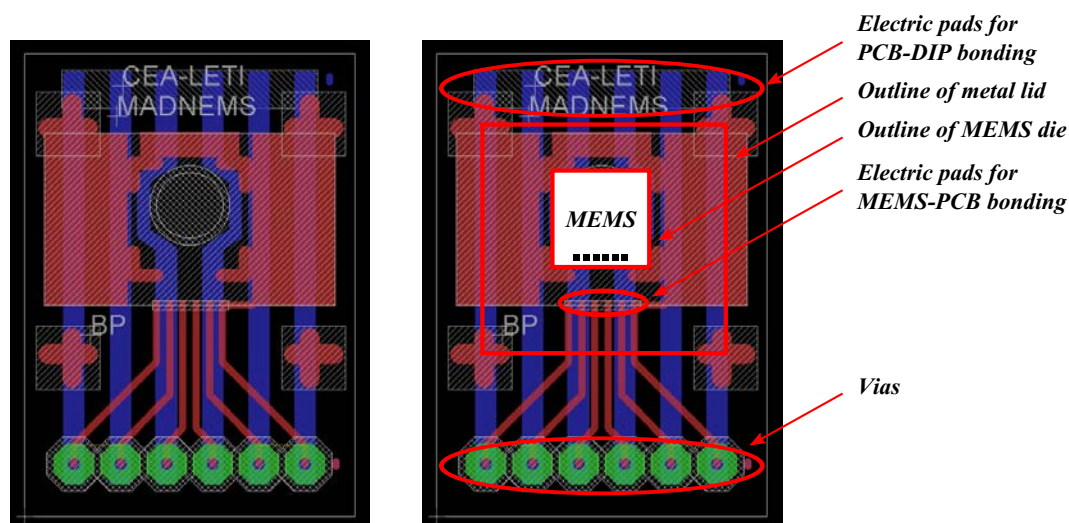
PCB substrate prepared for M&NEMS microphone chip-scale packaging (bottom port). Left side presents the PCB layout while the right side indicates the specific elements of the PCB.
